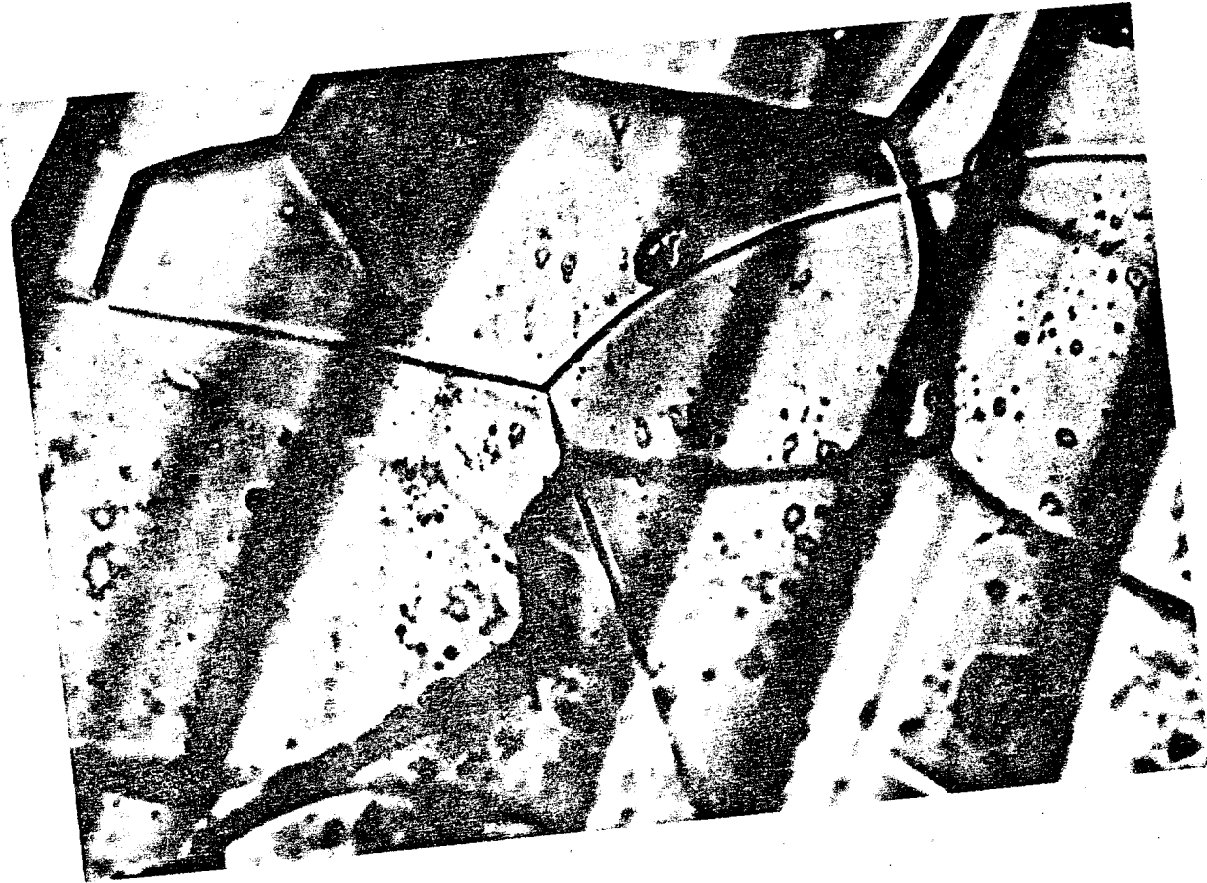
Cold shuts in electron-beam welded niobium. Looking vertically into weld seam.
